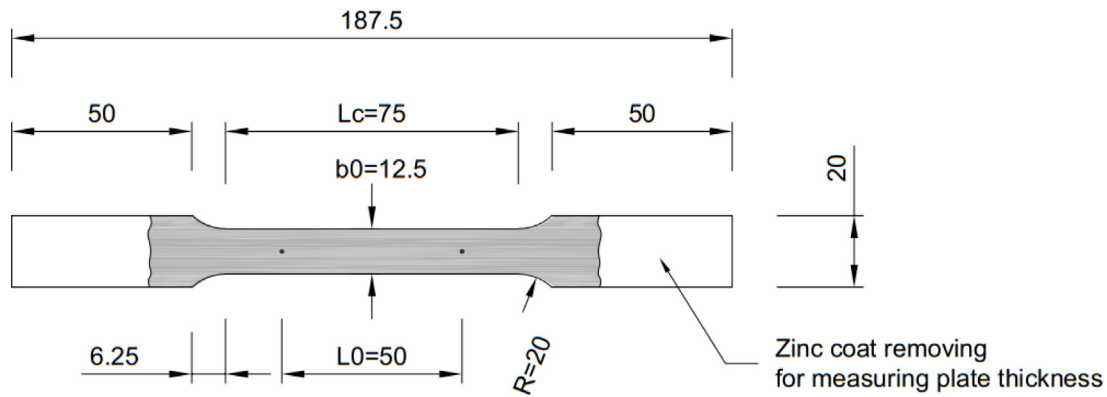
CFS coupon dimensions (unit: mm) [47].
